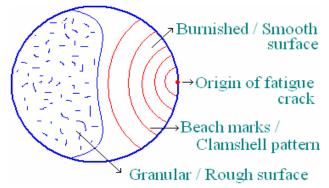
Schematic of fatigue fracture surface.
